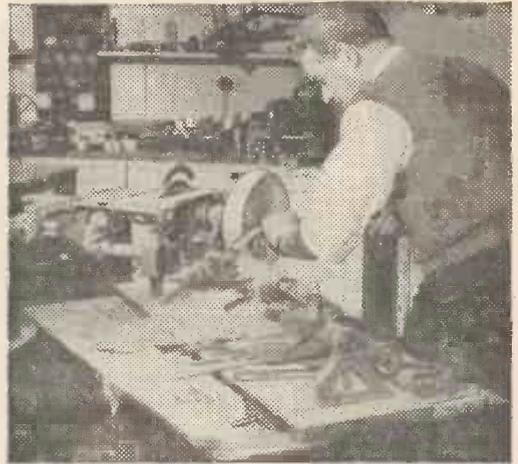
Providing chisels are kept sharpened the inside can be worked fairly rapidly, move the tool-rest closer as cutting proceeds.
